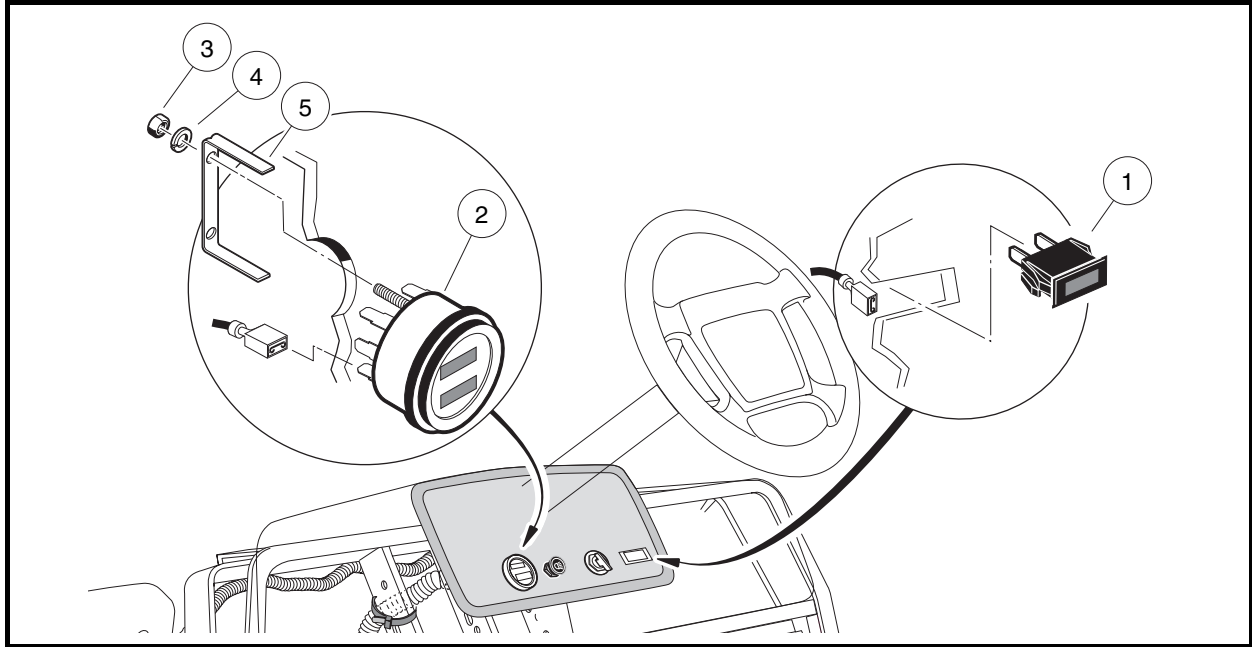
Fuel Gauge/Hour Meter and Oil Warning Light Assembly
